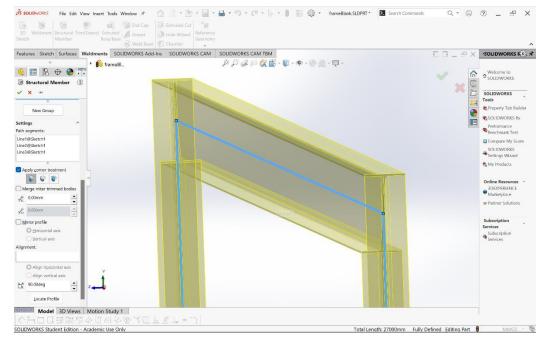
Sample Weldment, W 8x10, 90deg Rotation
